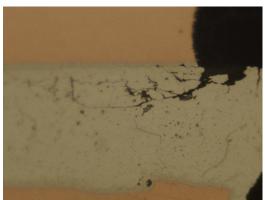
Detailed view of left and right corner joint for QFN's with 7 ppm/°C EMC and SAC305 solder joints without fillet (EMC = 7 ppm/°C)
